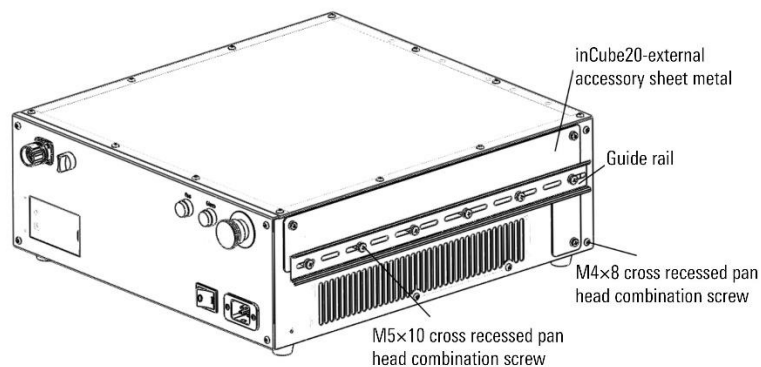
Installing inCube20-external sheet metal and guide rails
